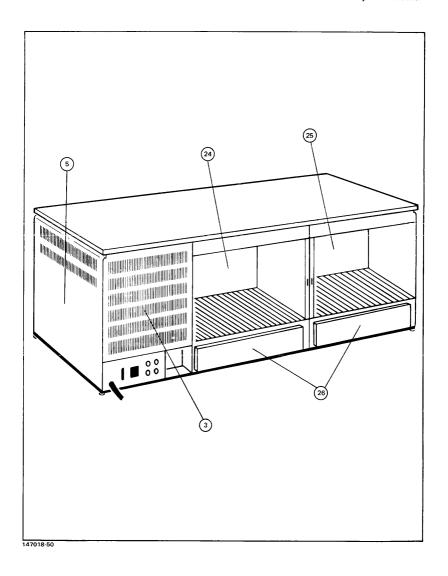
HP 3000 Series 33 Rear View (Sheet 3 of 3)
